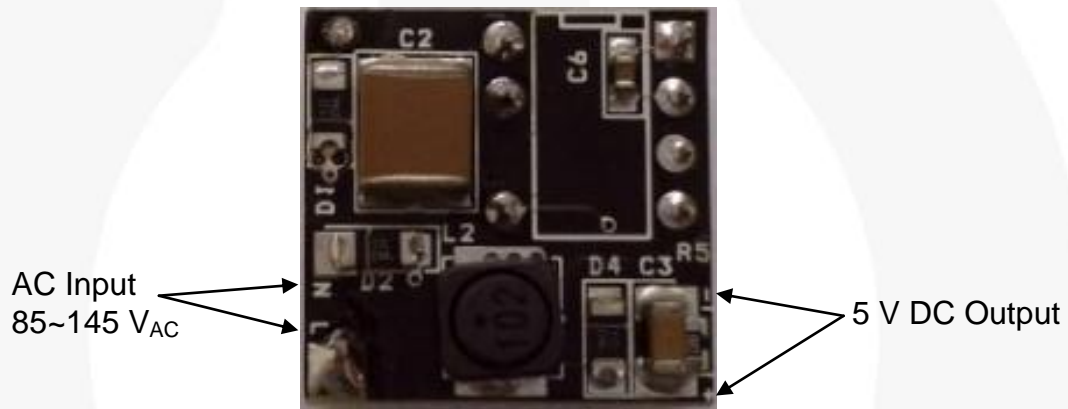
Bottom View (Dimension 18 x 18 [mm²])
